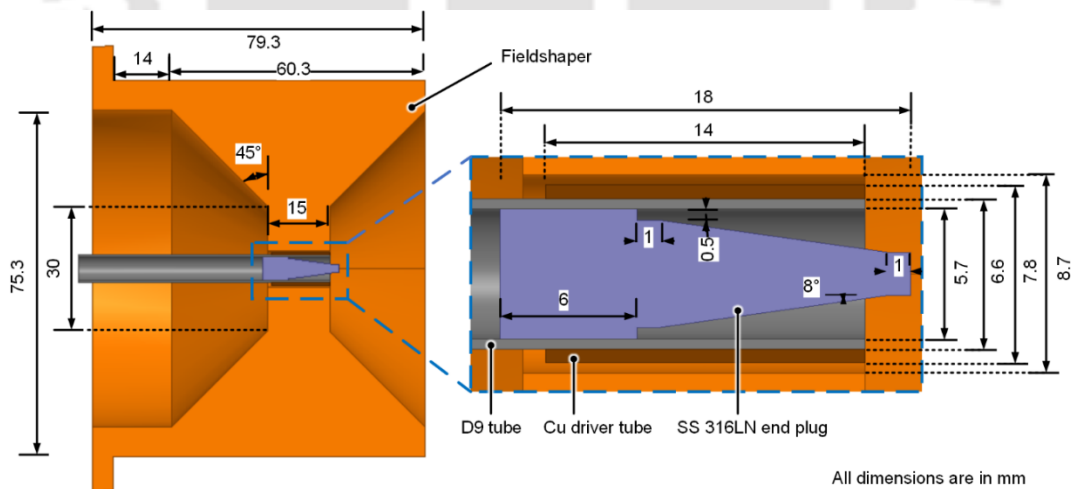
Dimensions of various parts of the components of the magnetic pulse welding setup
